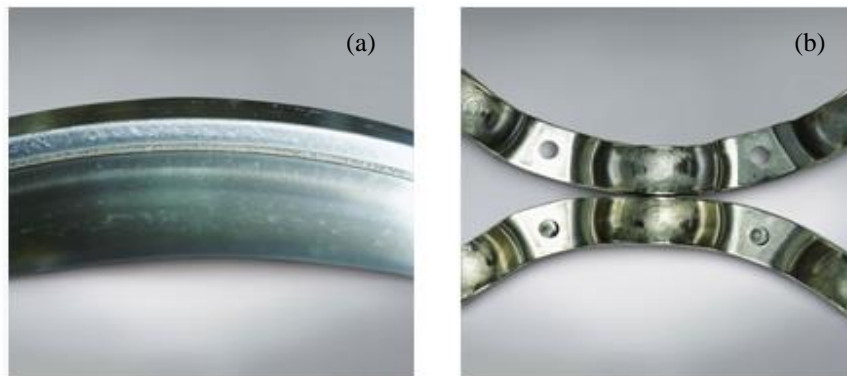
a) Inner ring of a spherical roller bearing b) Cage of a single-row ball bearing (NTN, 2017)
